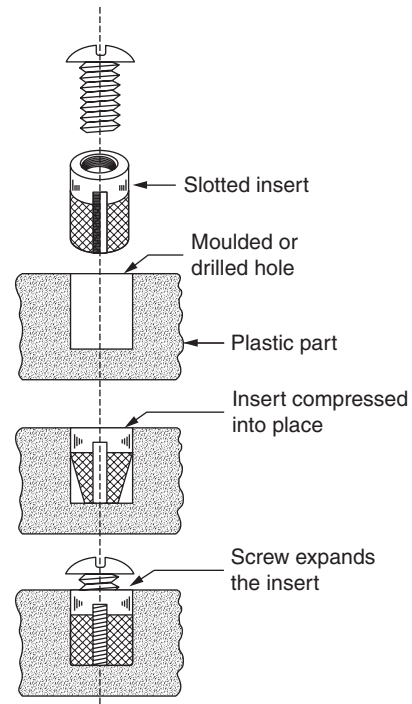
An expansion stud-type metal insert. It is used in plastic parts that have moulded or drilled holes.
